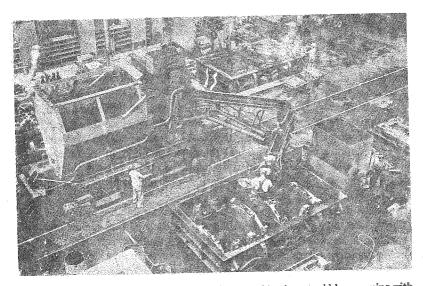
General view of foundry floor for making large mold by ramming with a motive slinger. (Courtesy of Beardsley-Piper Division, Pettibone Mulliken Corp.)
